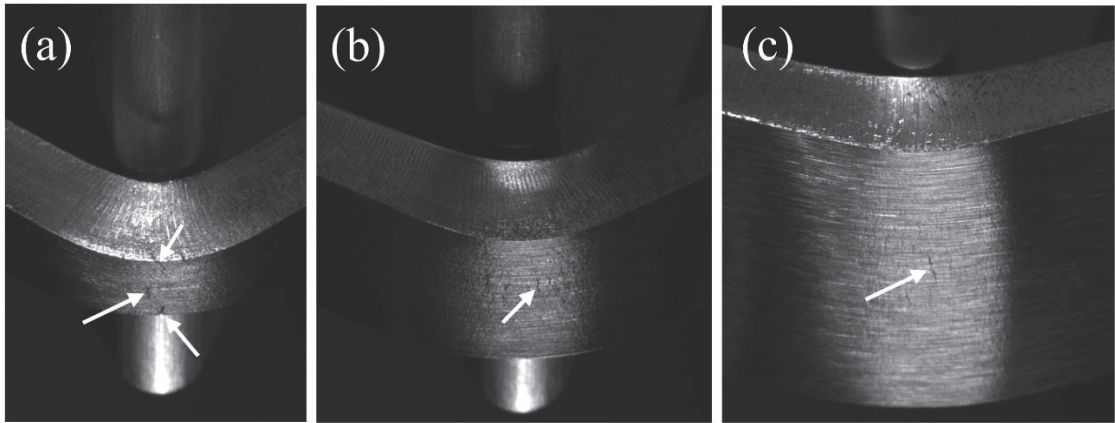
Example of crack initiation in 3-point bending test: (a) $w/t = 1.0$, (b) $w/t = 2.0$, (c) $w/t = 4.0$
